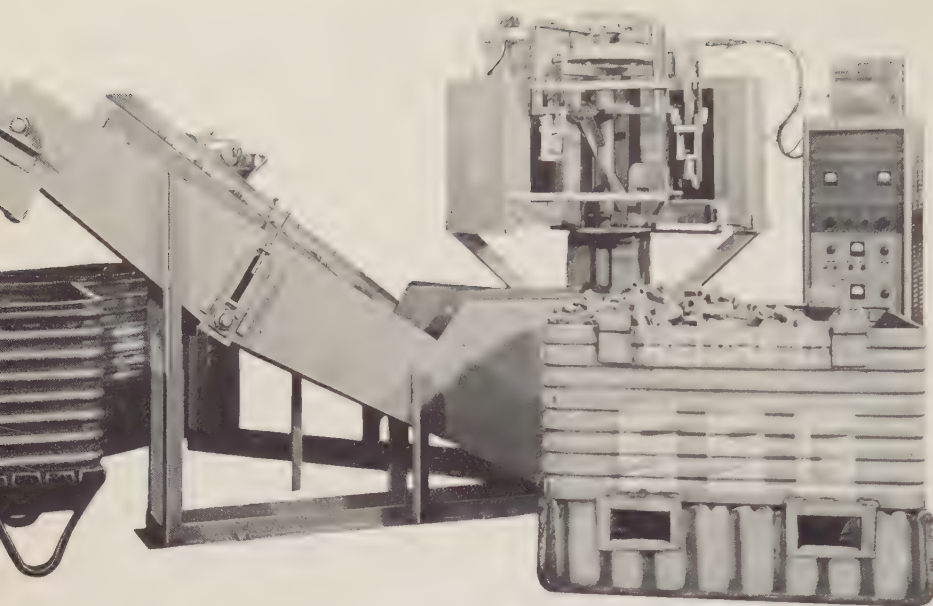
The sonic inspecting machine utilizes four work stations located 90° apart. The electronic control equipment is mounted in a separate cabinet positioned to the right of the machine. The hopper in the right foreground contains universal joint slip yoke castings ready to be inspected. The conveyor in the left background transfers good castings to a hopper which, when full, is shipped to a customer. The conveyor in the left foreground is used to transfer defective castings to a hopper for removal from the work area.
